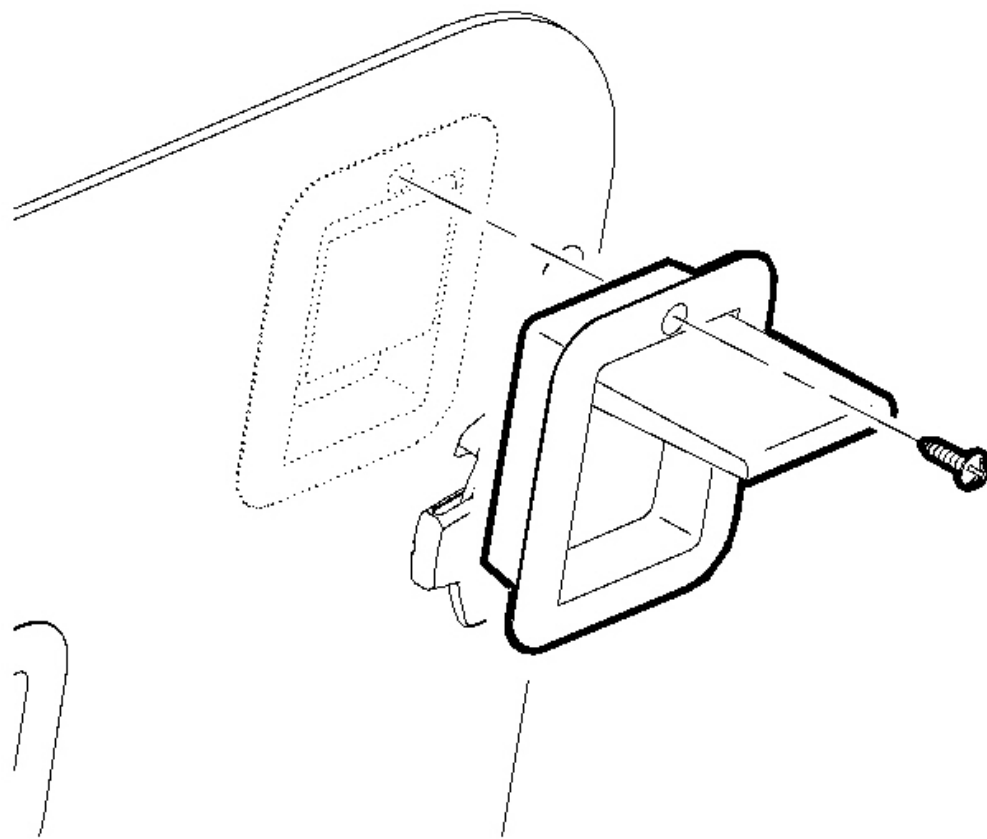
Removing/Installing Fastener From The Rear Seat Back Latch
